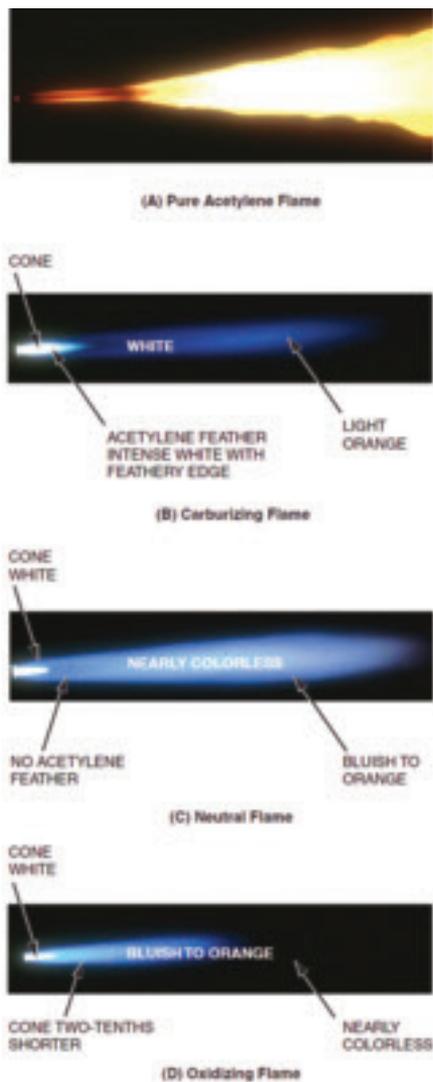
Acetylene flame color guide. From the AWS Guidelines for Hand Soldering Practices.
